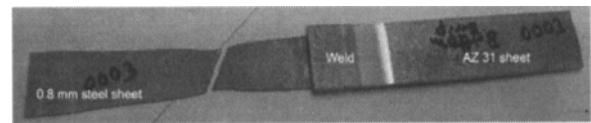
A lap-shear specimen: failure occurred by steel sheet fracture, leaving the weld intact.
